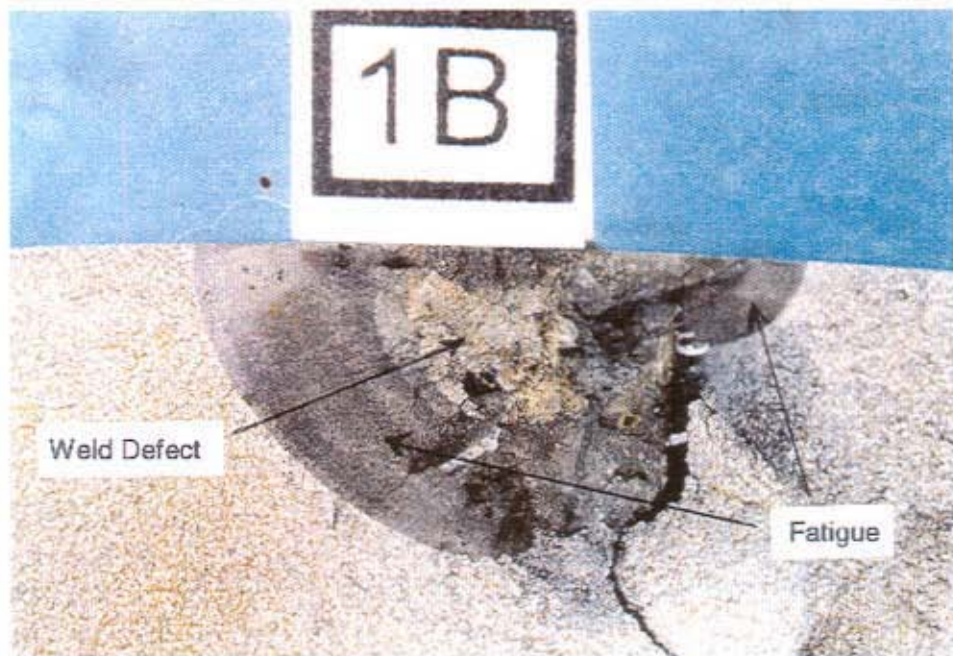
Initial defect at keyway 1B with fatigue crack extension after ultrasonic cleaning. (ATLSS)
